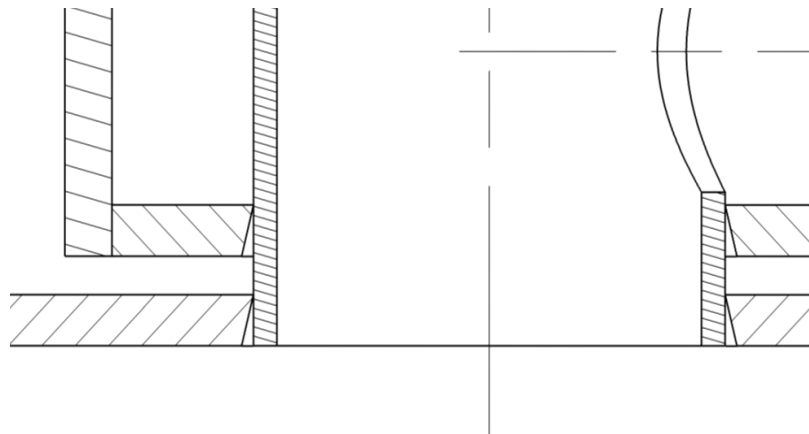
Section view of the vertical connection pipe to handler arm bottom plate and end-effector connection
